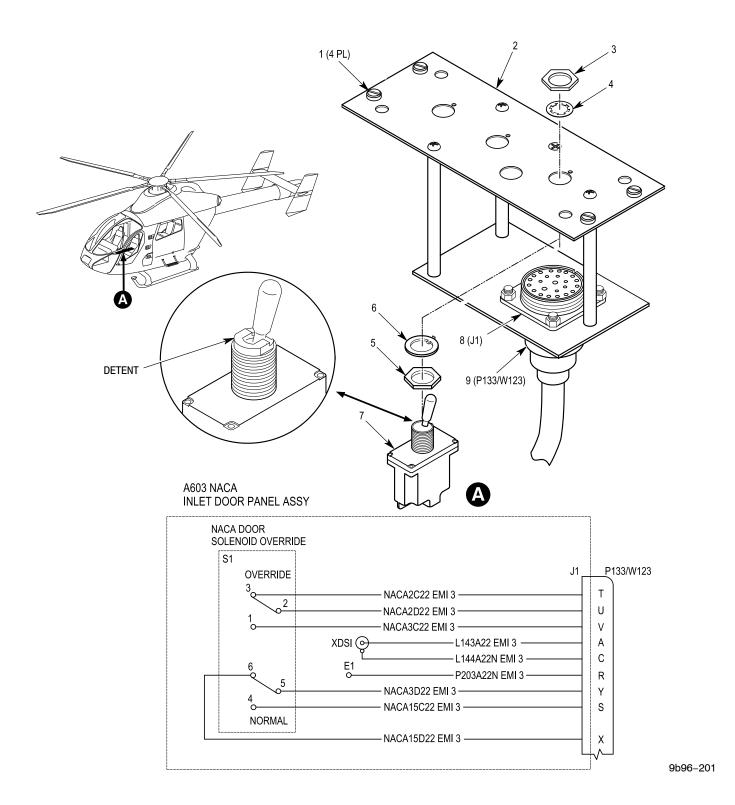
NACA Inlet Door Panel Assembly and Electrical Schematic
